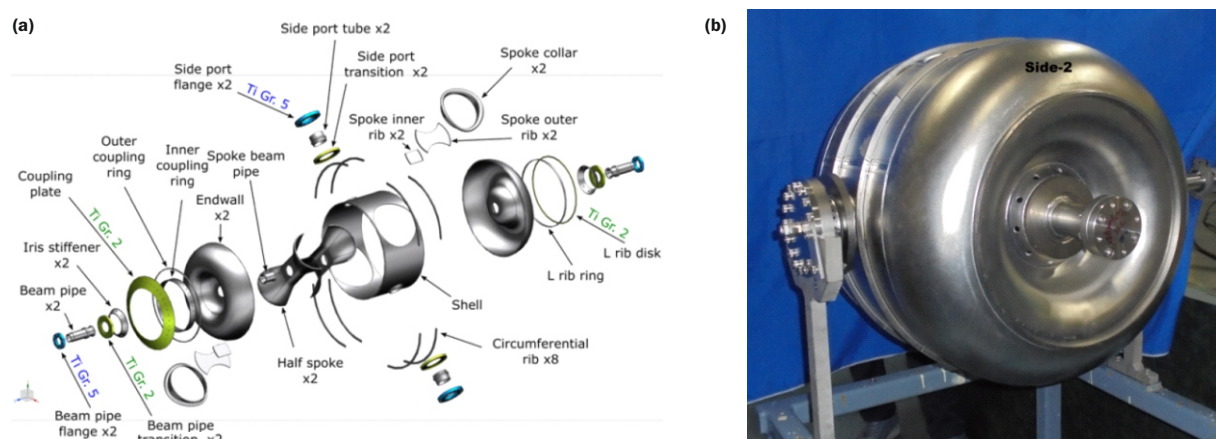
(a) SSR2 Bare Cavity Exploded View. (b) SSR2 Bare Cavity.
